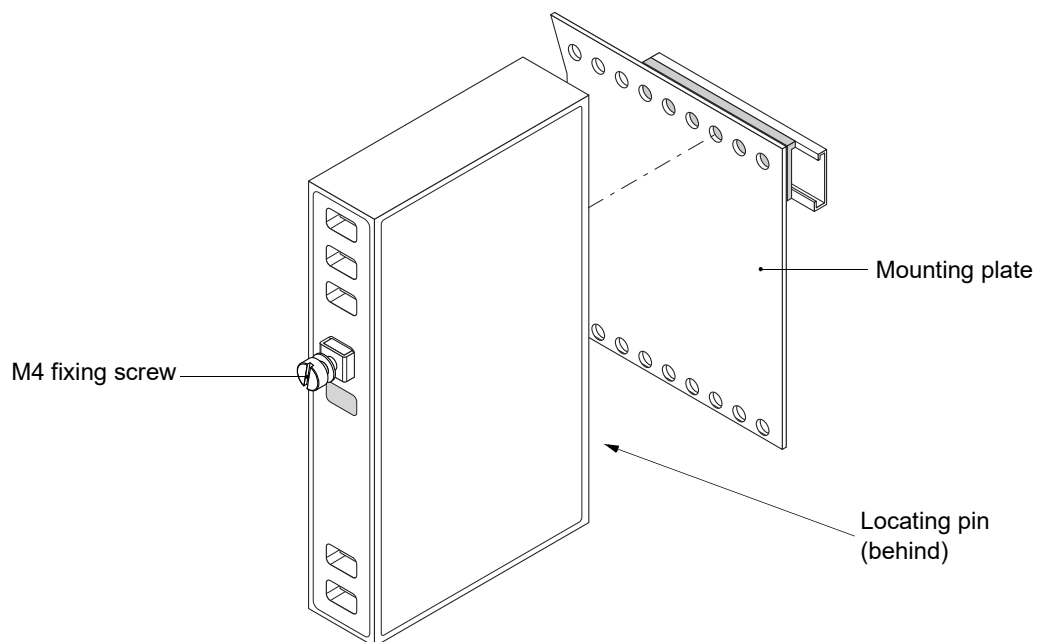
The mounting plate used by GSI122 and GSI130 galvanic separation units
